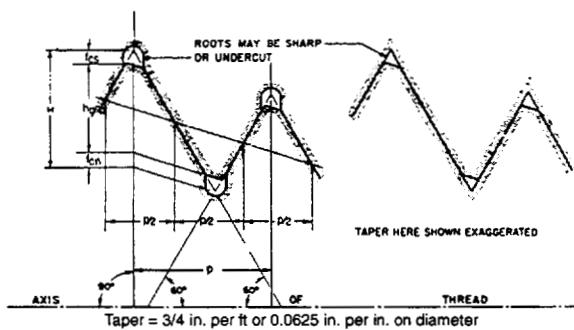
Gauge Thread Form for Line Pipe and Round Thread Casing and Tubing
